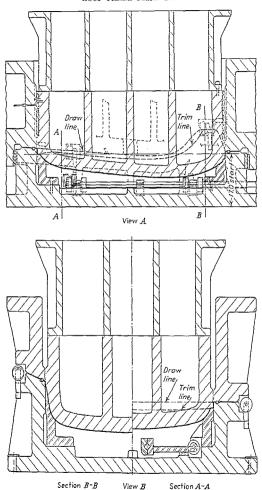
Cross sections through a roof-panel draw die; view A, section at center line; view B, half sections at front and rear of roof panel, (Ford Motor Co.)
